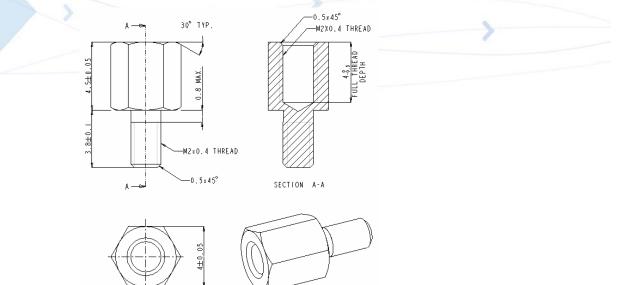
W24 + G24 Stacked Mounting Spacer Dimentions
